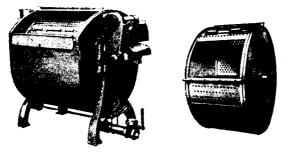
Rotating drum machine for dyeing hose (Courtesy of Samuel Pegg)
